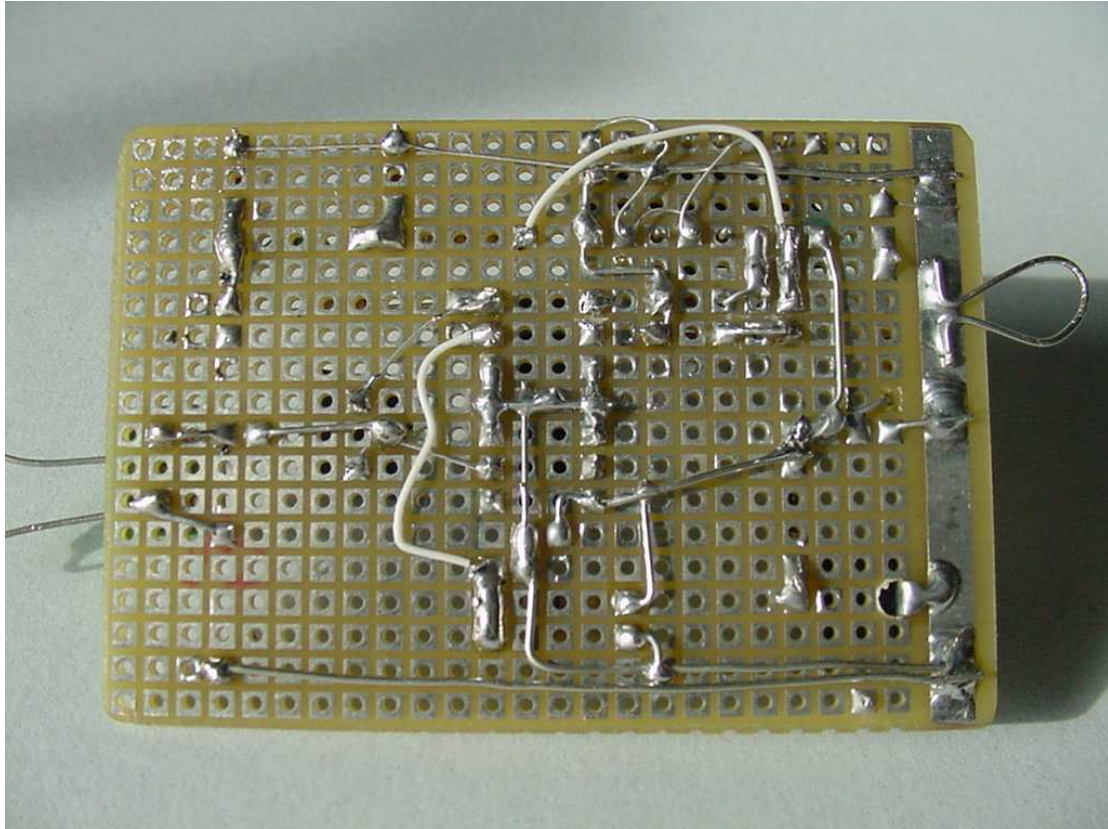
Point-to-point soldered prototype (see Figure 4 for PCB version)
